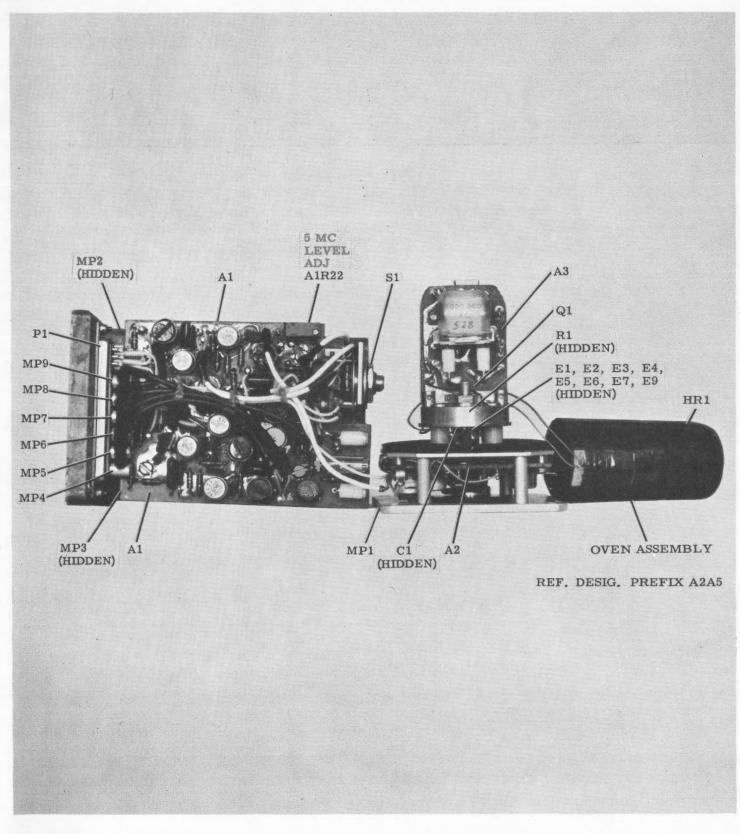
Frequency Standard Electronic Assembly, Front View, (Oven Disassemblied), Component Location
